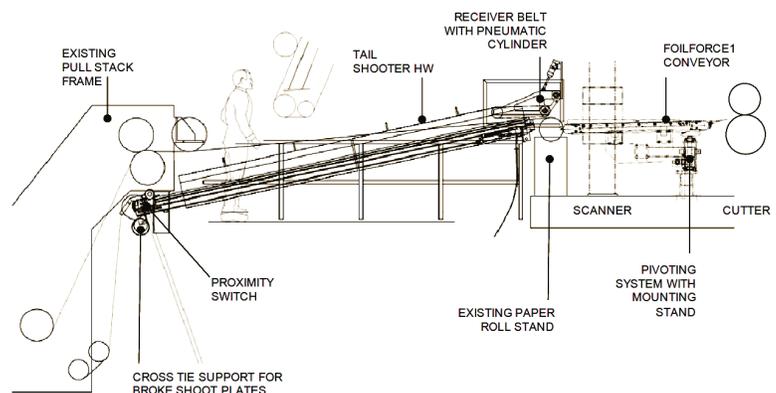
Pull stack to cutter threading rebuild included TailShooter HW and FoilForce units, with a driven paper carrying roll.
